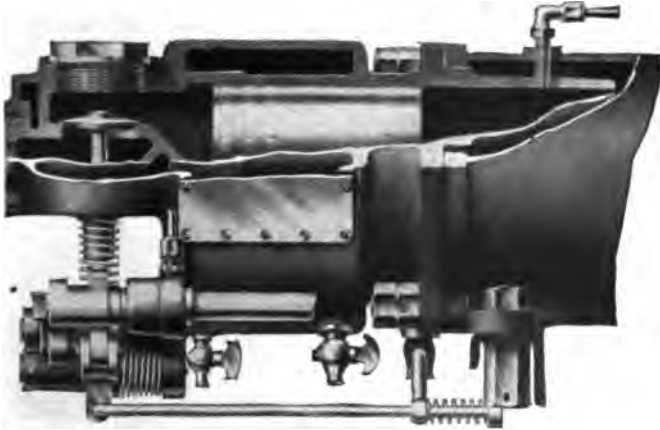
Part Sectional View of the Olds Motor, showing valve-operating mechanism.
